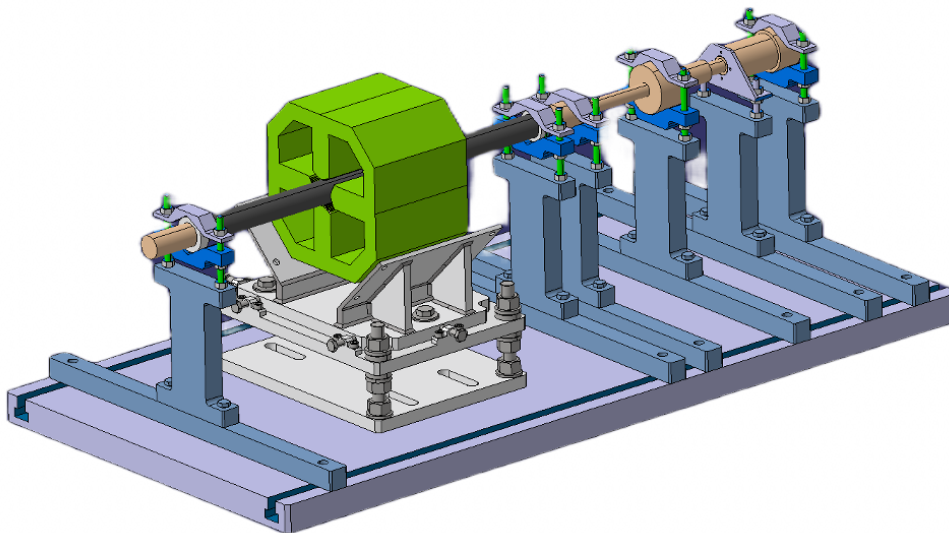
A 3D view of the design measurement bench for rotating coil system alignment in the magnet bore.
